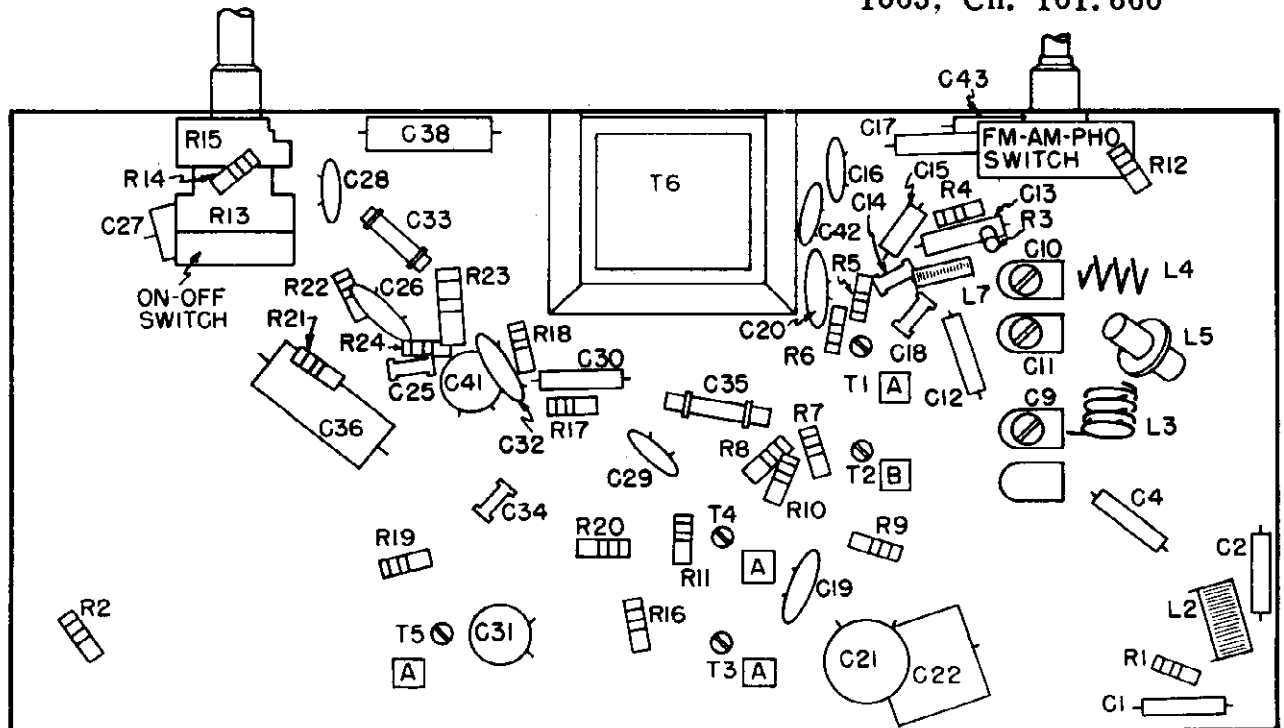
RADIO CHASSIS LAYOUT - BOTTOM VIEW
